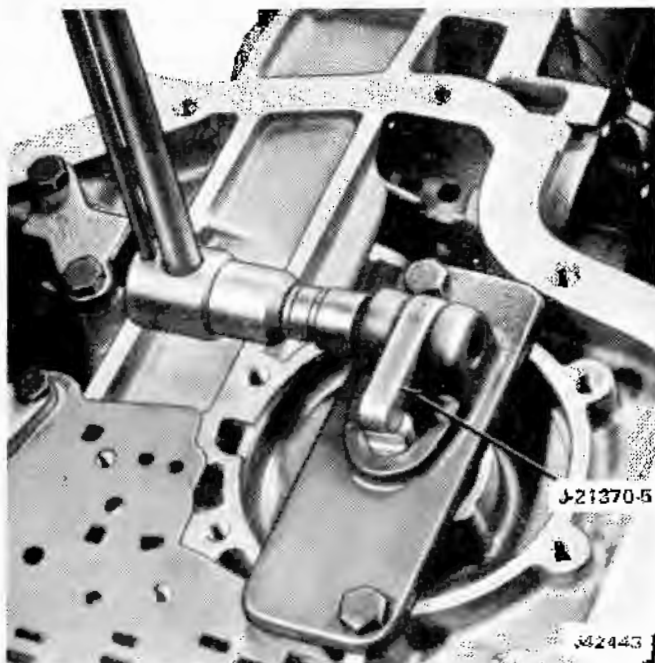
Checking Band-Apply Pin of Rear Bands
